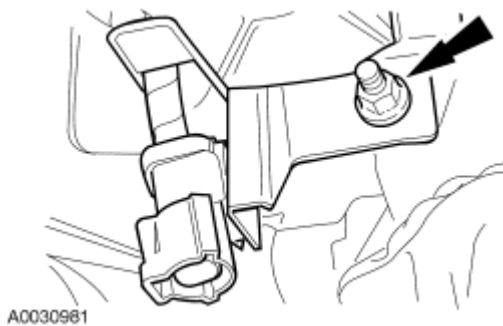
Locating Catalyst Monitor Sensor Electrical Connector Bracket Nut
